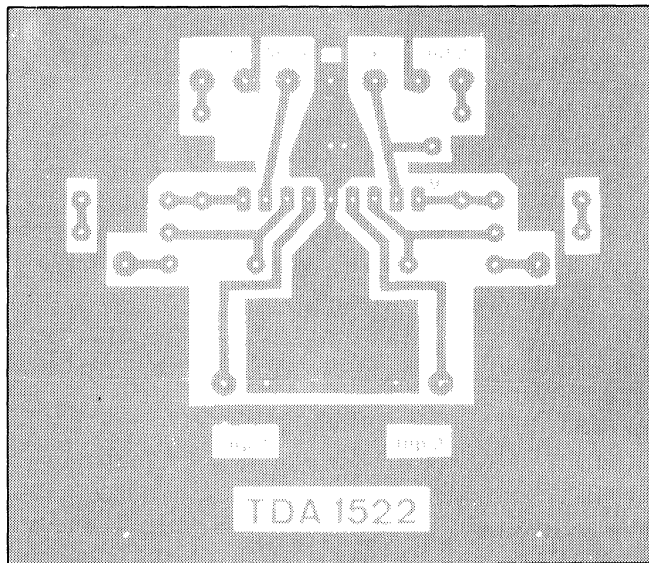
Printed-circuit board, showing track side. Dimensions 75 mm x 65 mm.
